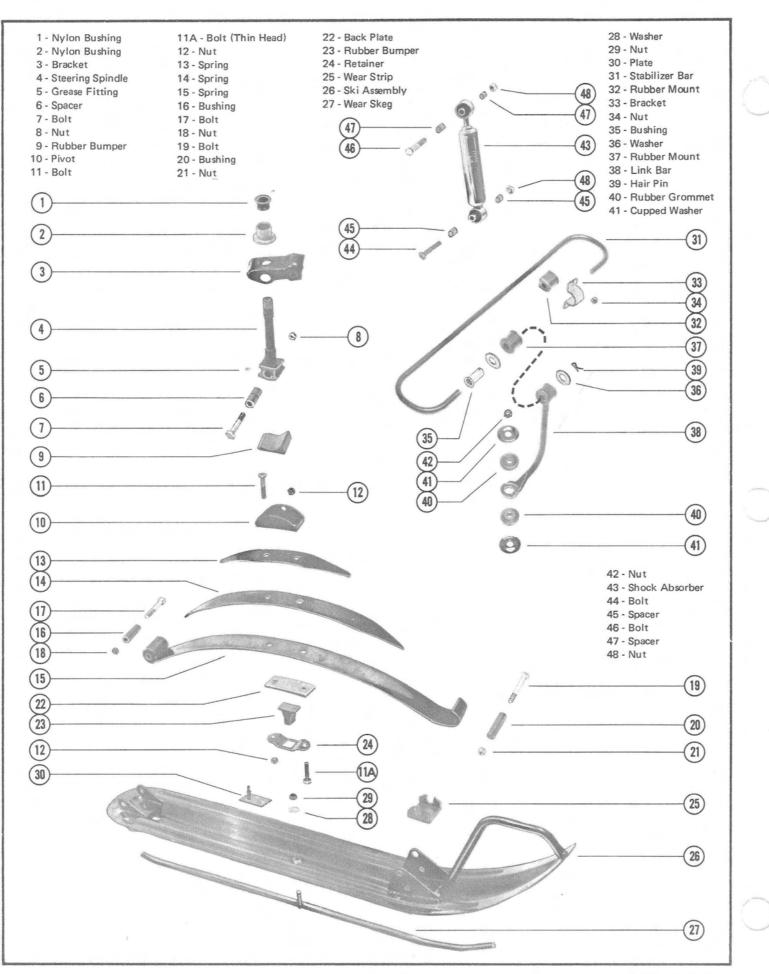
Ski, Spring, Spindle and Stabilizer Components for 440 MAX (Chassis Serial No. 3709838 and Above) and 440 S/R Models 2A-4 - CHASSIS
